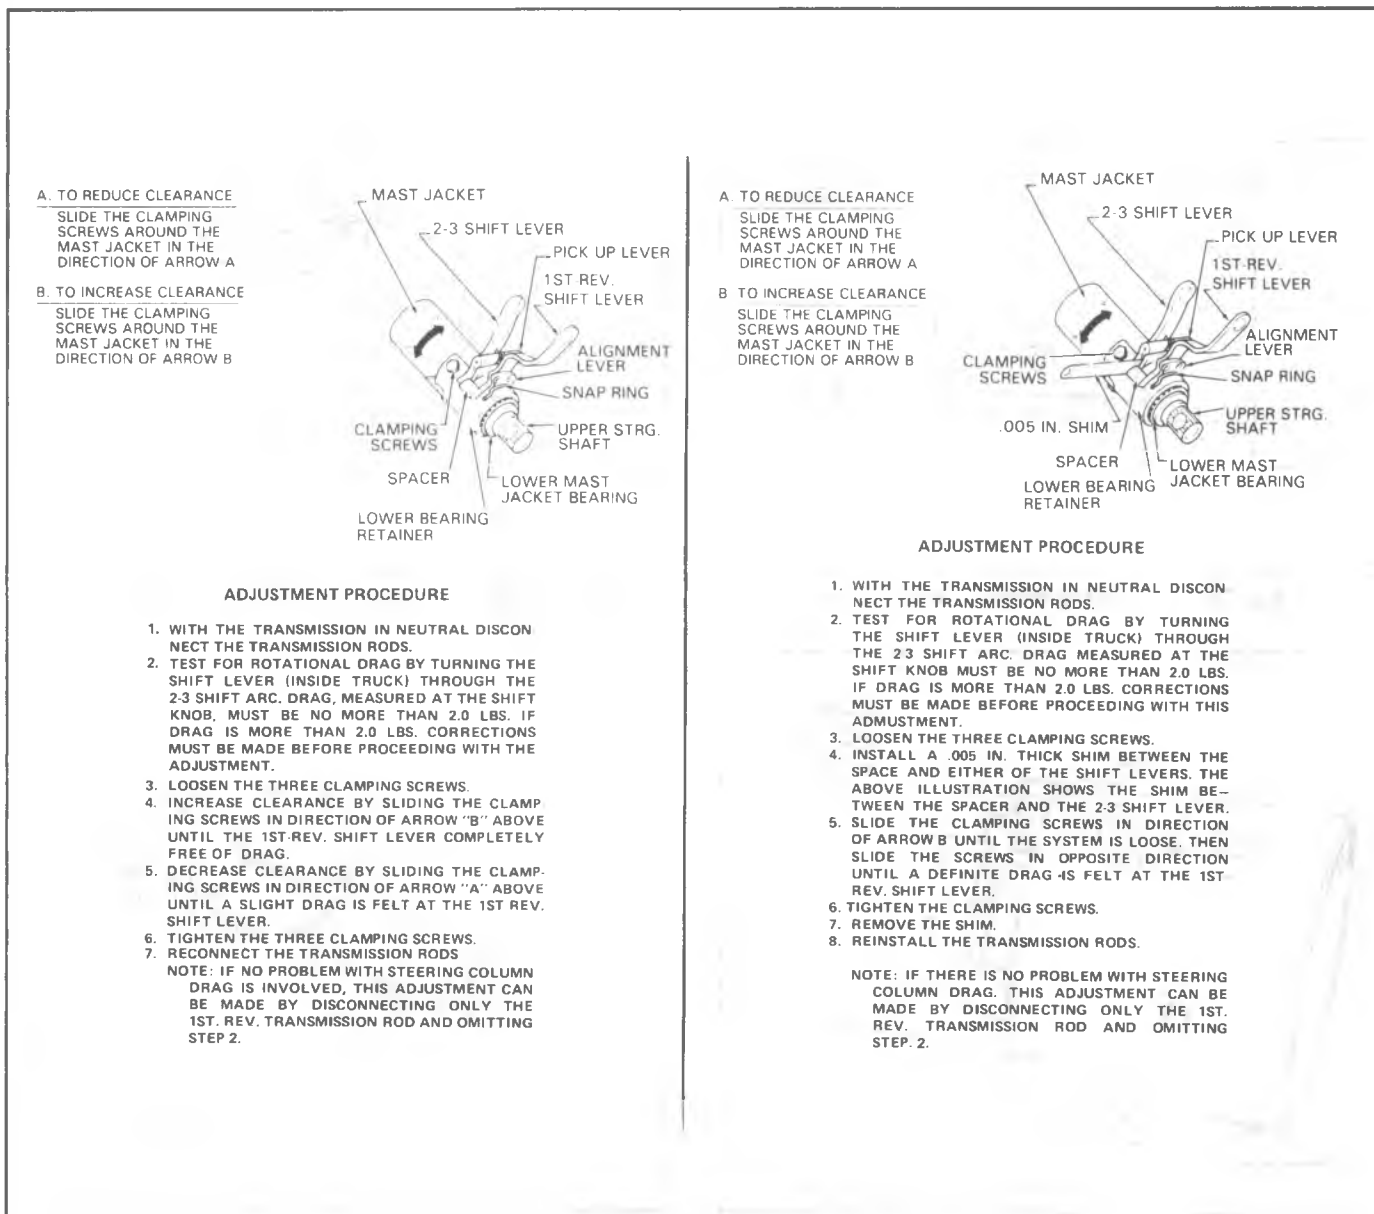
B5-29--Adjusting Lower Bearing-Typical
